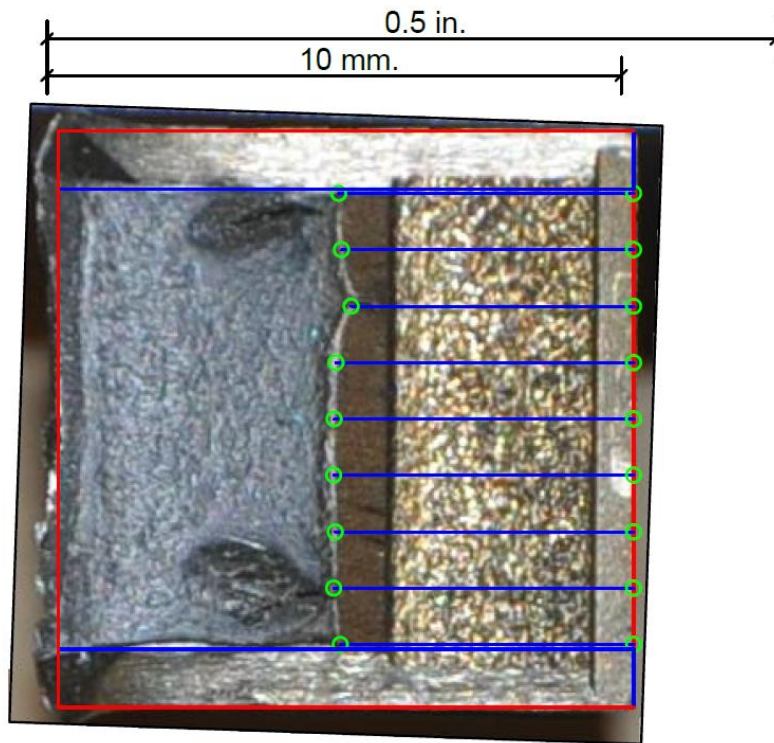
Specimen F20' Fracture Surface
